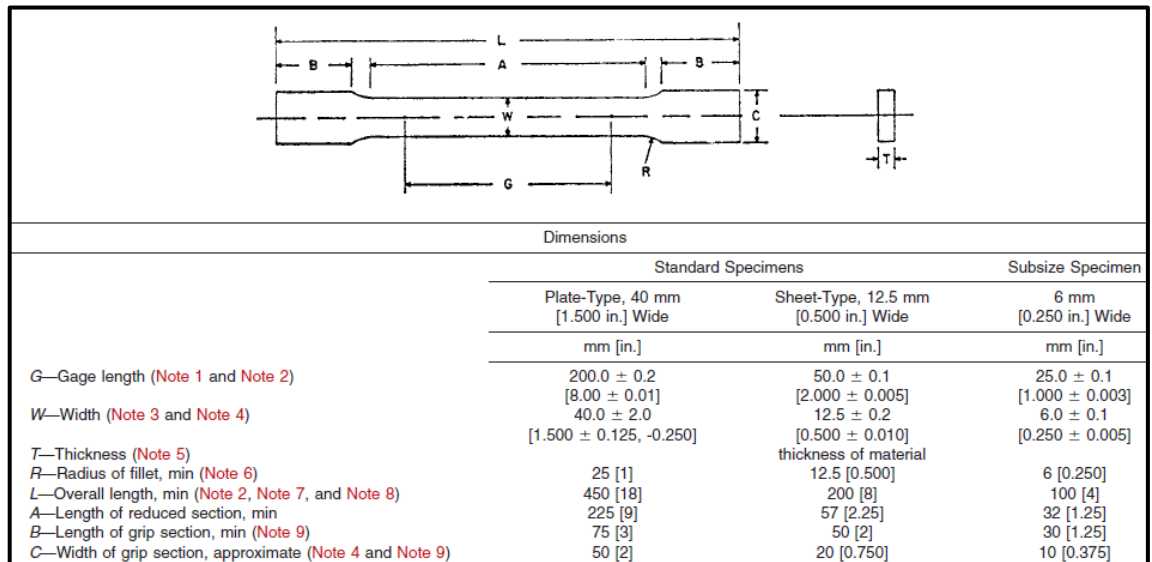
Dimensions Required for Subsize Tensile Specimen, Reproduced from ASTM E8/E8M (2015).
